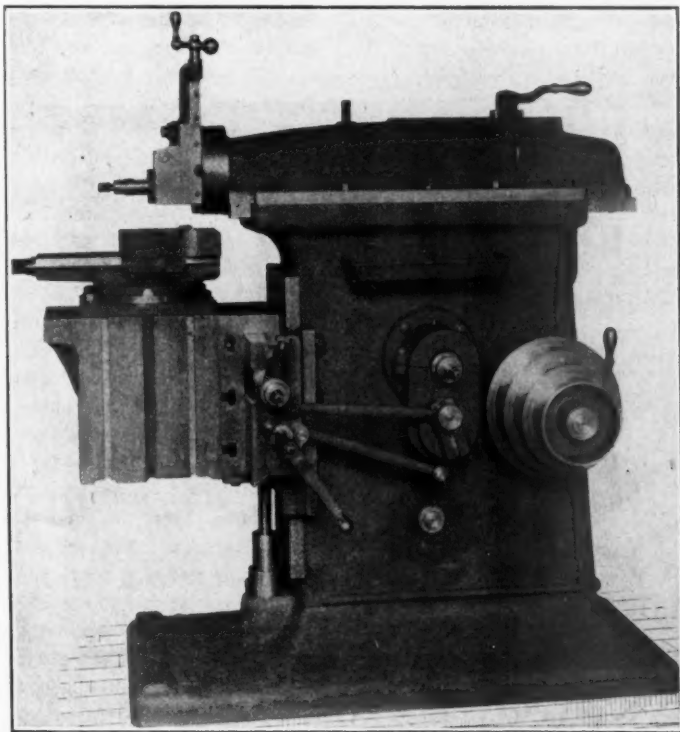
16-IN. CRANK SHAPER.—QUEEN CITY MACHINE TOOL COMPANY.
